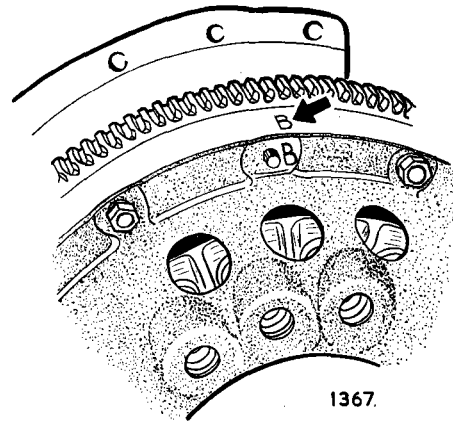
Showing the balance marks "B" on the clutch and flywheel.
